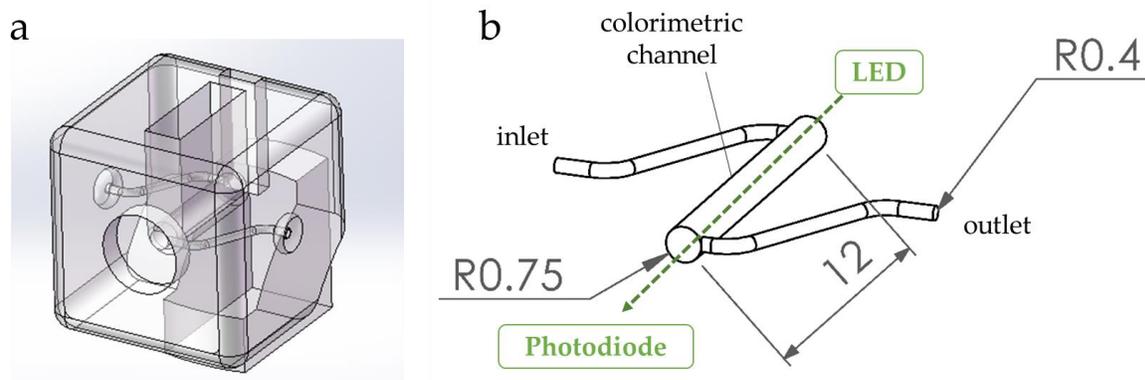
Dimensions of the colorimetric module. (a). A transparent illustration of the colorimetric module frame (without black epoxy resin, LED, and photodiode). (b). Geometry and dimensions of the actual fluid channel inside the module. Unit:mm.
